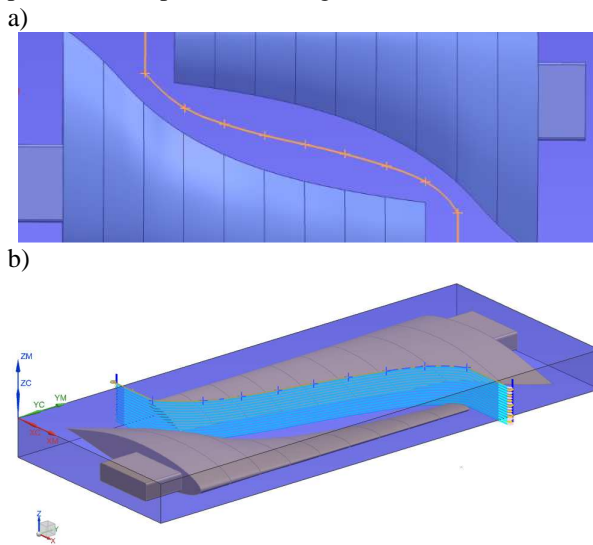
Processes for cutting the proton billet. a) Assemble and sketch, b) Simulation paths for cutting.
